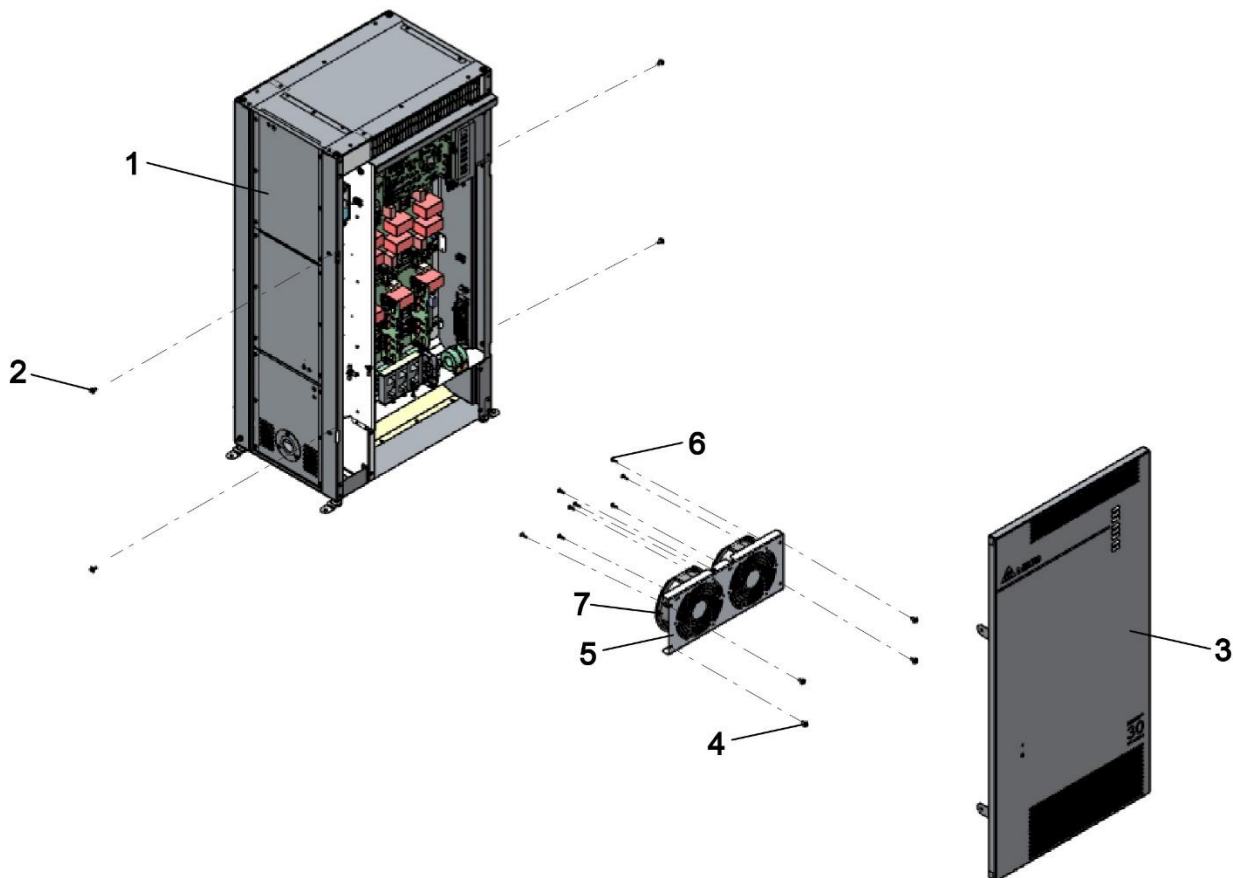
WPB – Accessing Fan Panel Assembly WPB
